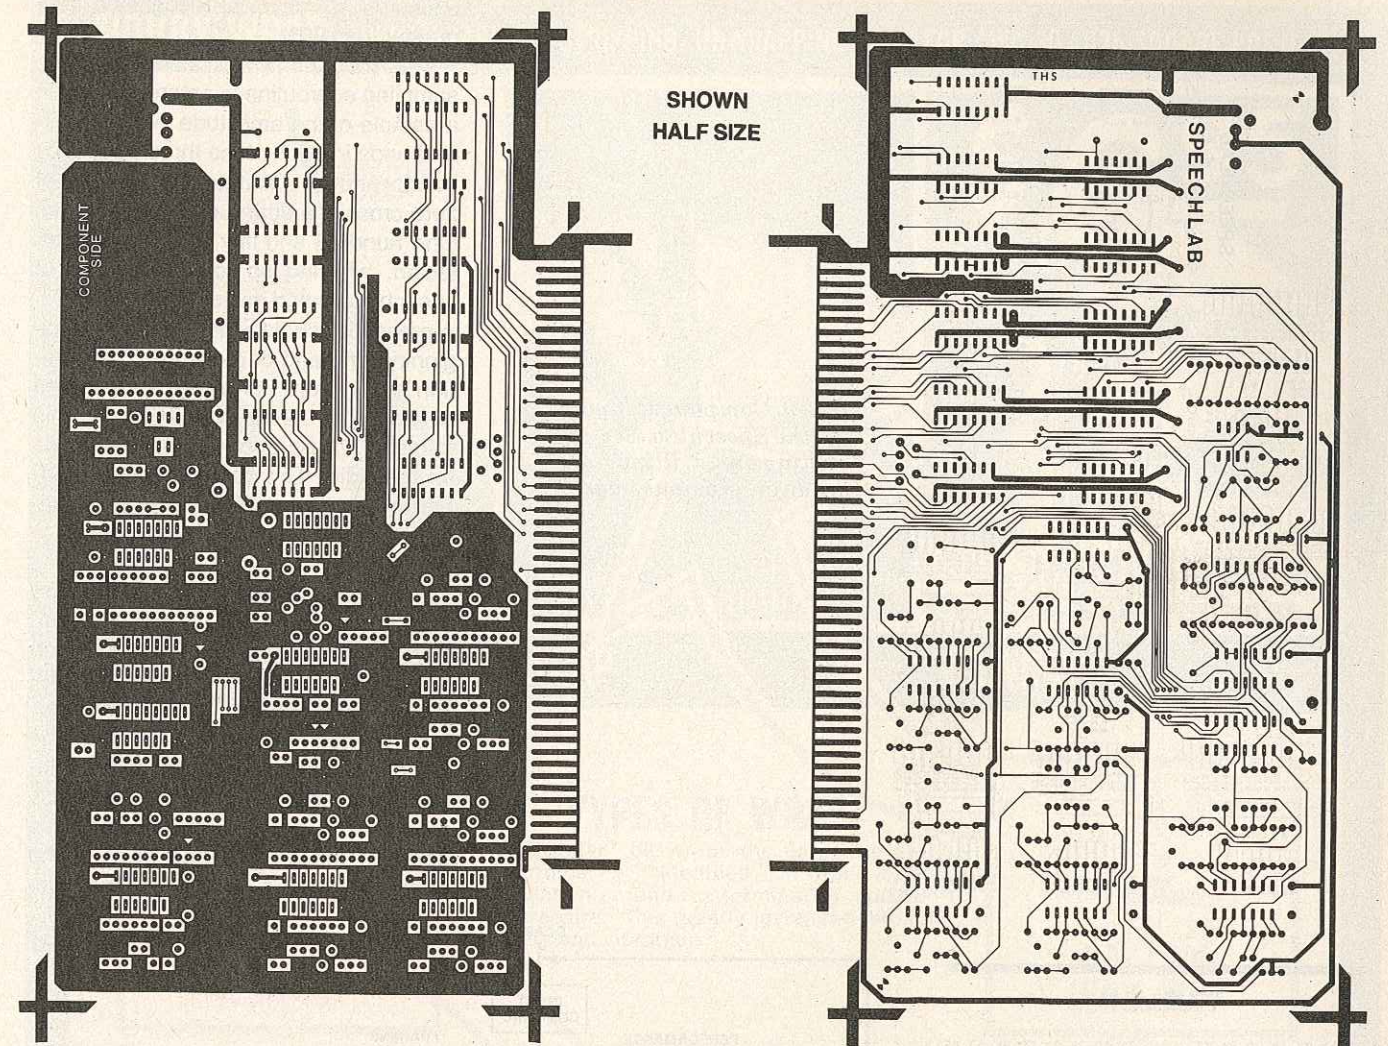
Etching and drilling guides for pc board are shown half size. Guide at left is the component side. Component layout is in Fig. 9.
